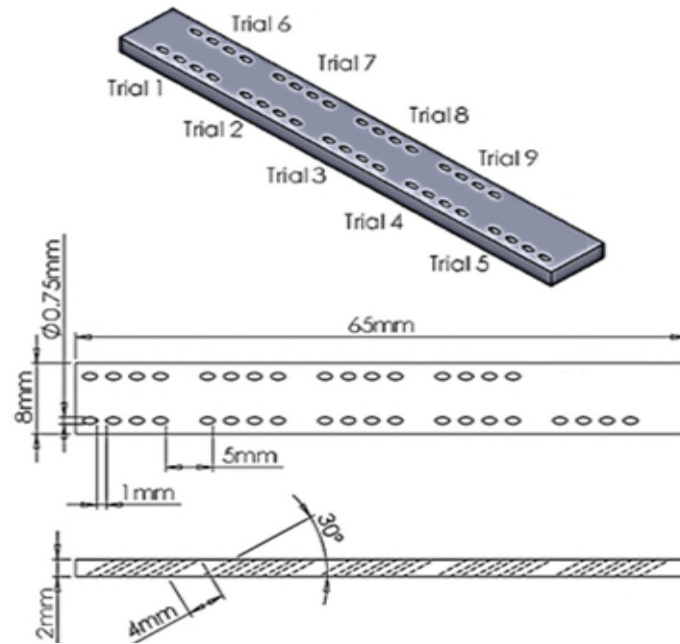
Schematic layout of the Ni-base CMSX-4 specimen's arrangement for laser drilling (dimensions not to scale).
